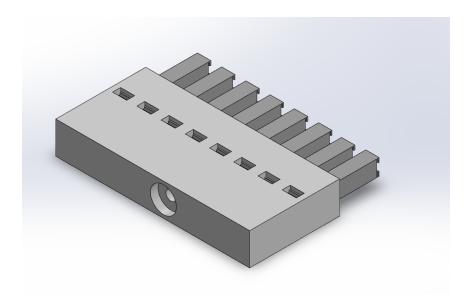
CAD Design of Buckle Holder with 8 Buckles Attached
